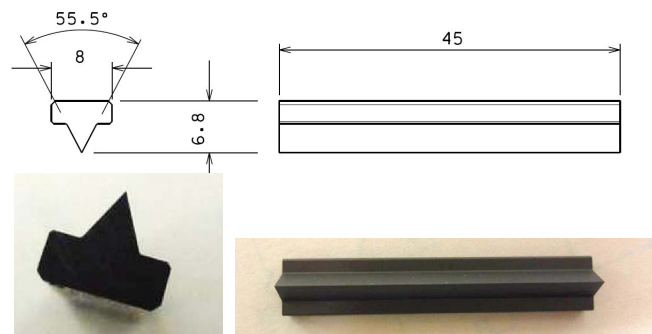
Drawings and photographs of the Tungsten Carbide knife-edge. The units are millimeters.
